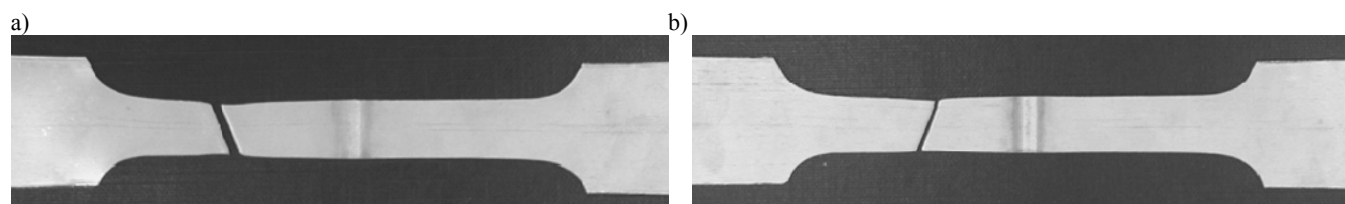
A view of samples after tensile test of the titanium alloy Ti6Al4V butt joints 1.5 mm thick laser welded with HPDL laser, tensile strength of the welded joints 961-994 MPa (Table 5); a) joint no. 1 (P1), b) joint no. 2 (P2)
